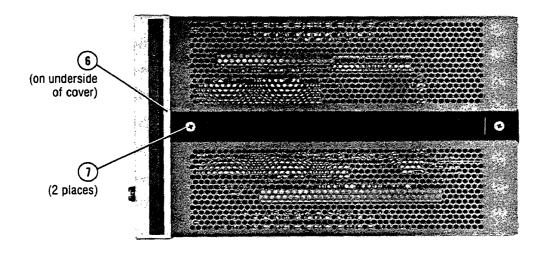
Attaching Hardware, Inside Front Panel Assembly (2 of 9)
